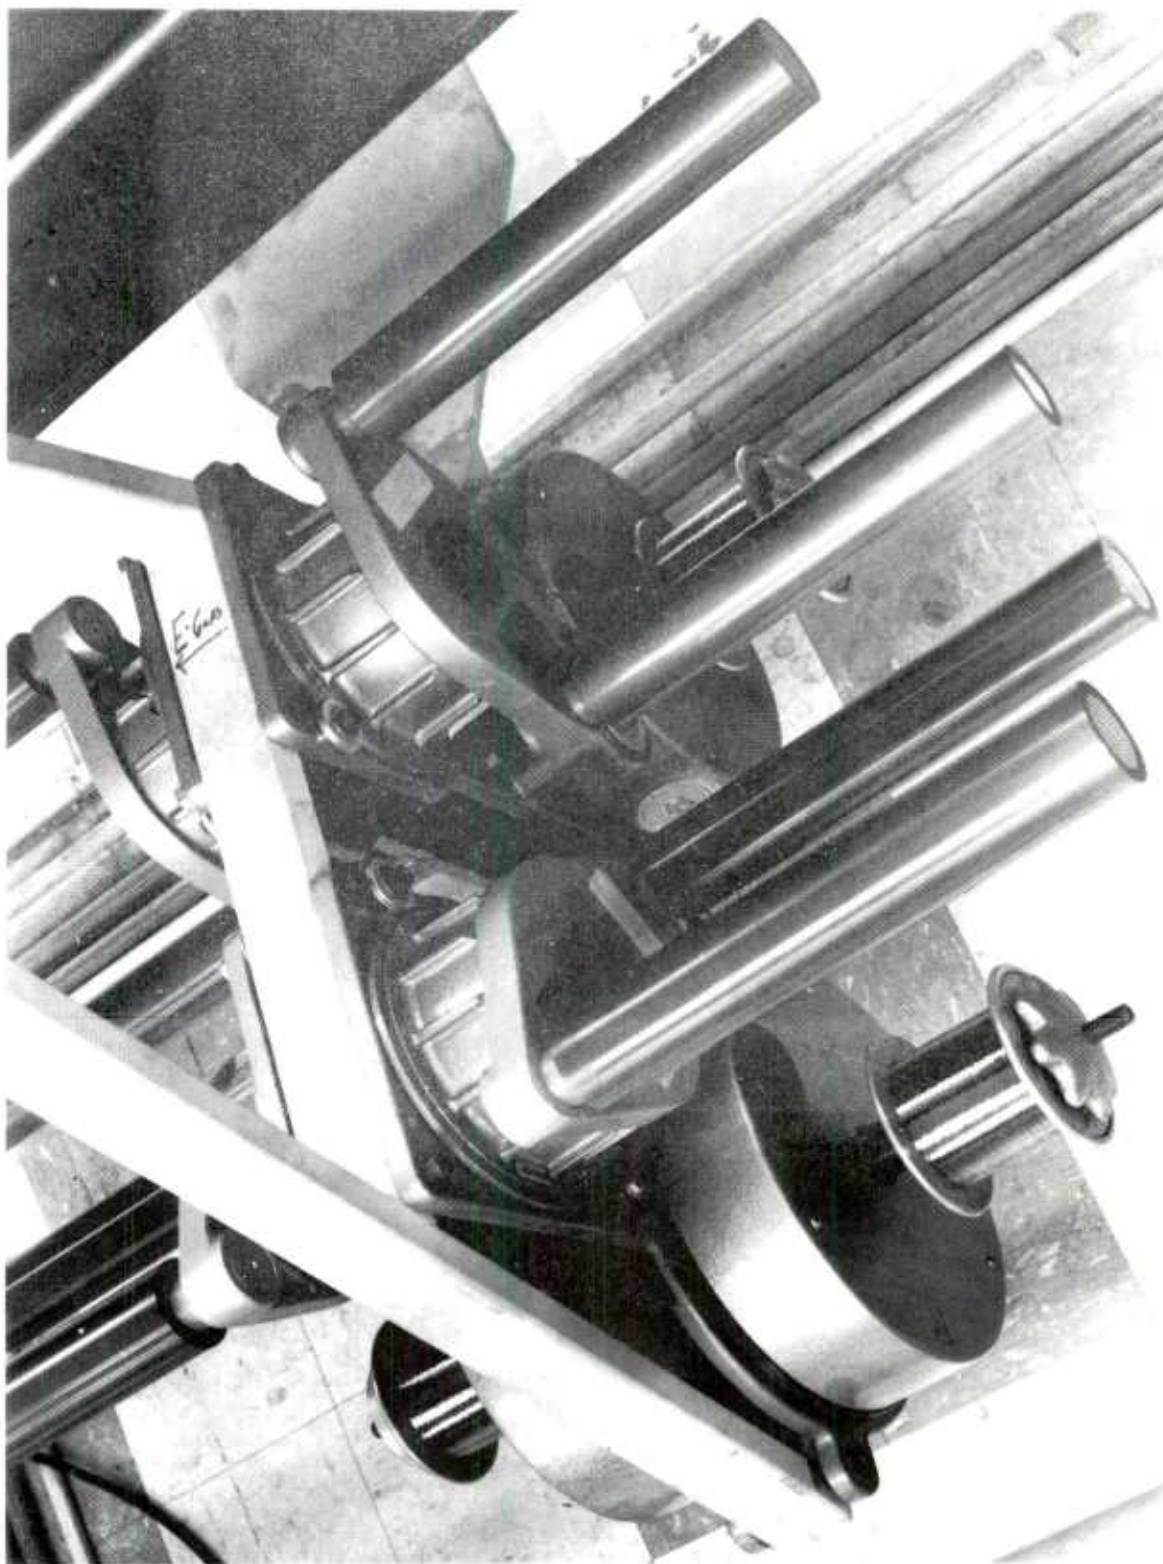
Filament winder's rear carriage assembly holding the four tension devices with wire spools.
